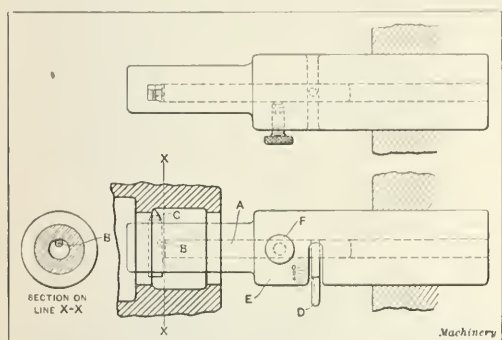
Handy Type of Boring-bar for performing Recessing Operations
